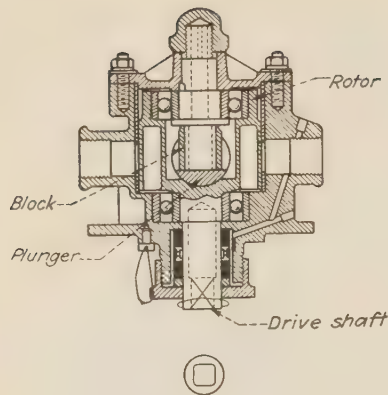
ROTO PLUNGE RECIPROCATING PUMP, ENGLAND
